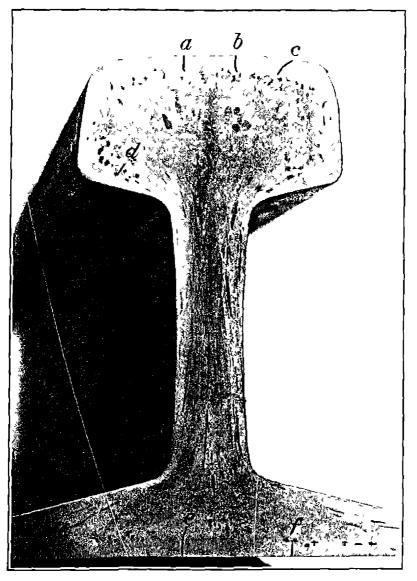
Cross section of rail place marked No 1 beyond limits of split herd – Laminated seams at places marked a/b/c, d, c and f, revealed by bending a thin section of the rail
